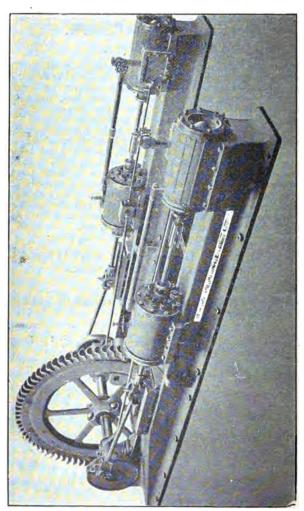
Class G.-Rix Combined Duplex Steam Actuated and Shaft-driven Compressor. Manufactured by Fulton Engineering and Shipbui'ding Works, San Francisco.
